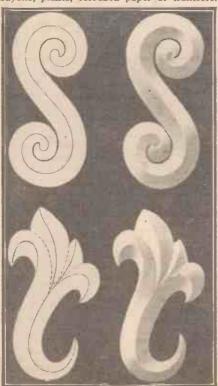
The method of marking out two scroll designs and the results after cutting and moulding.
